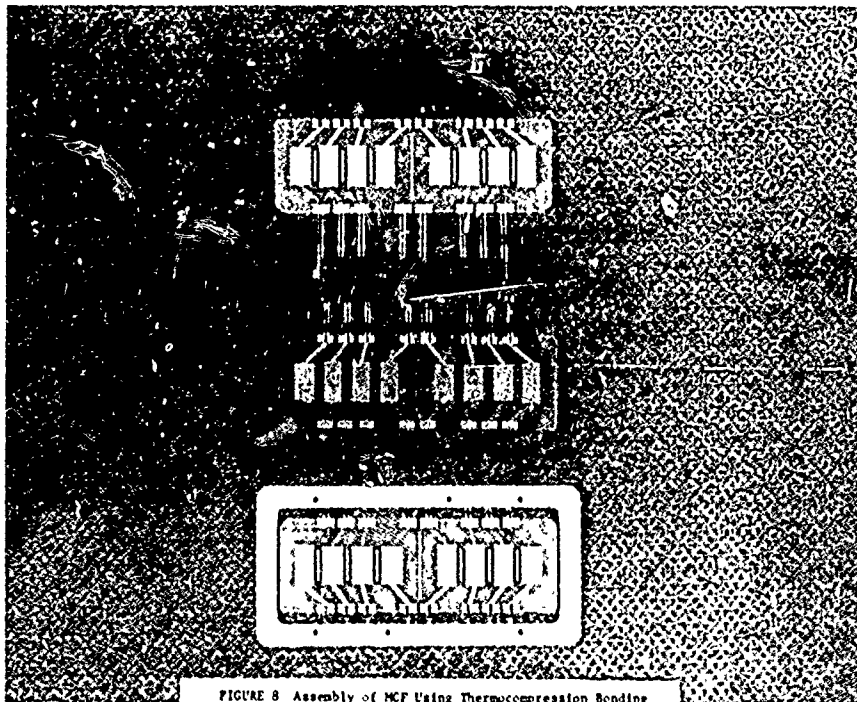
Assembly of MCF Using Thermocompression Bonding
